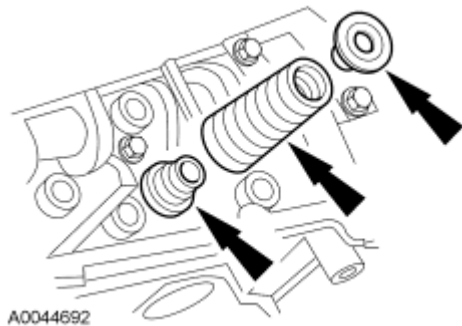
Locating Valve, Spring Retainer, Valve Spring & Valve Seal
